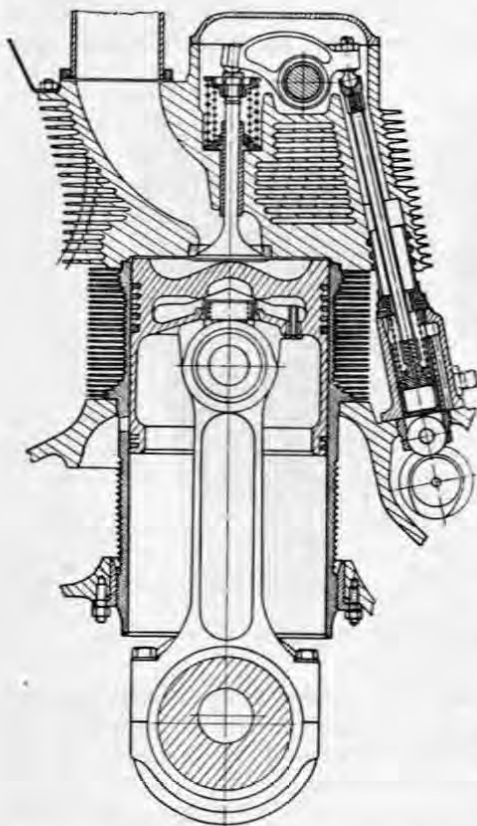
Design of an air-cooled two-stroke engine of 140 mm bore.
